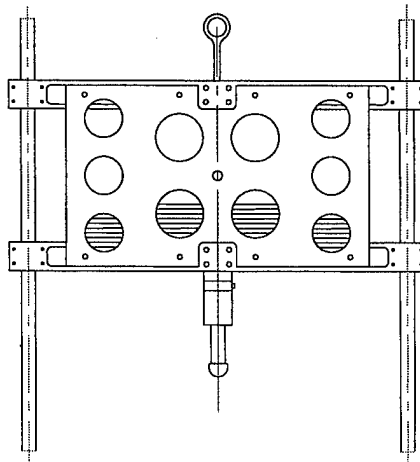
HEAVY WEIGHT IMPACTOR ASSEMBLY-I
